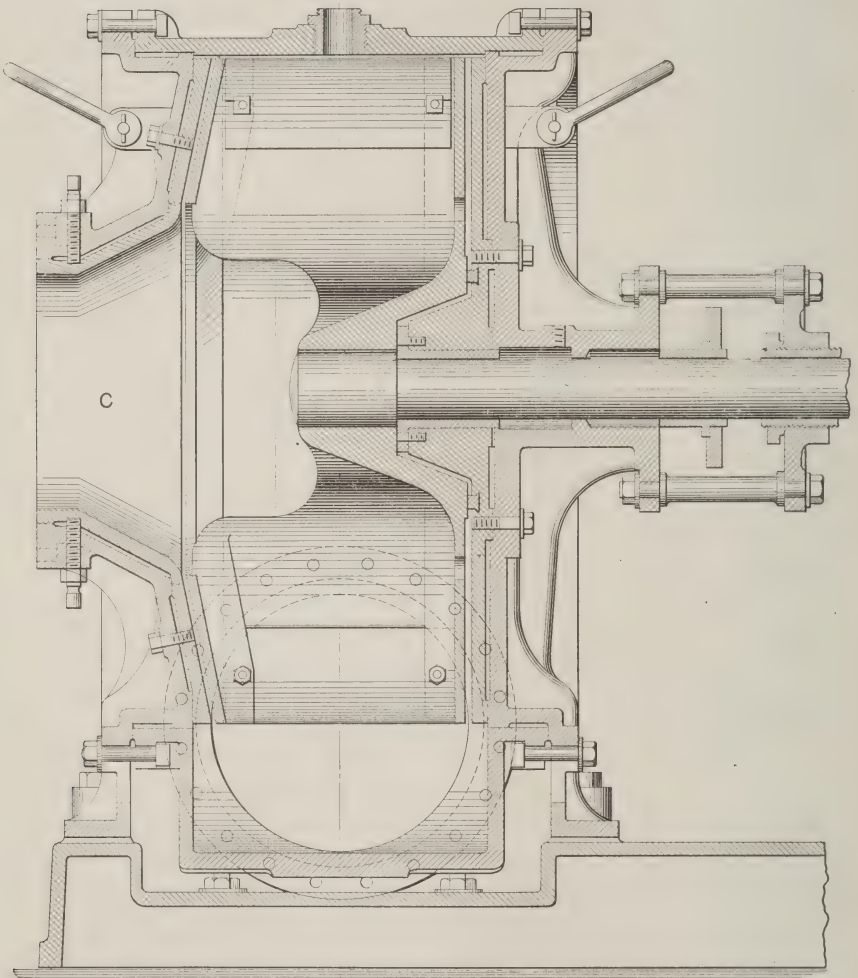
SECTIONAL VIEW OF CENTRIFUGAL PUMP FOR DREDGING
